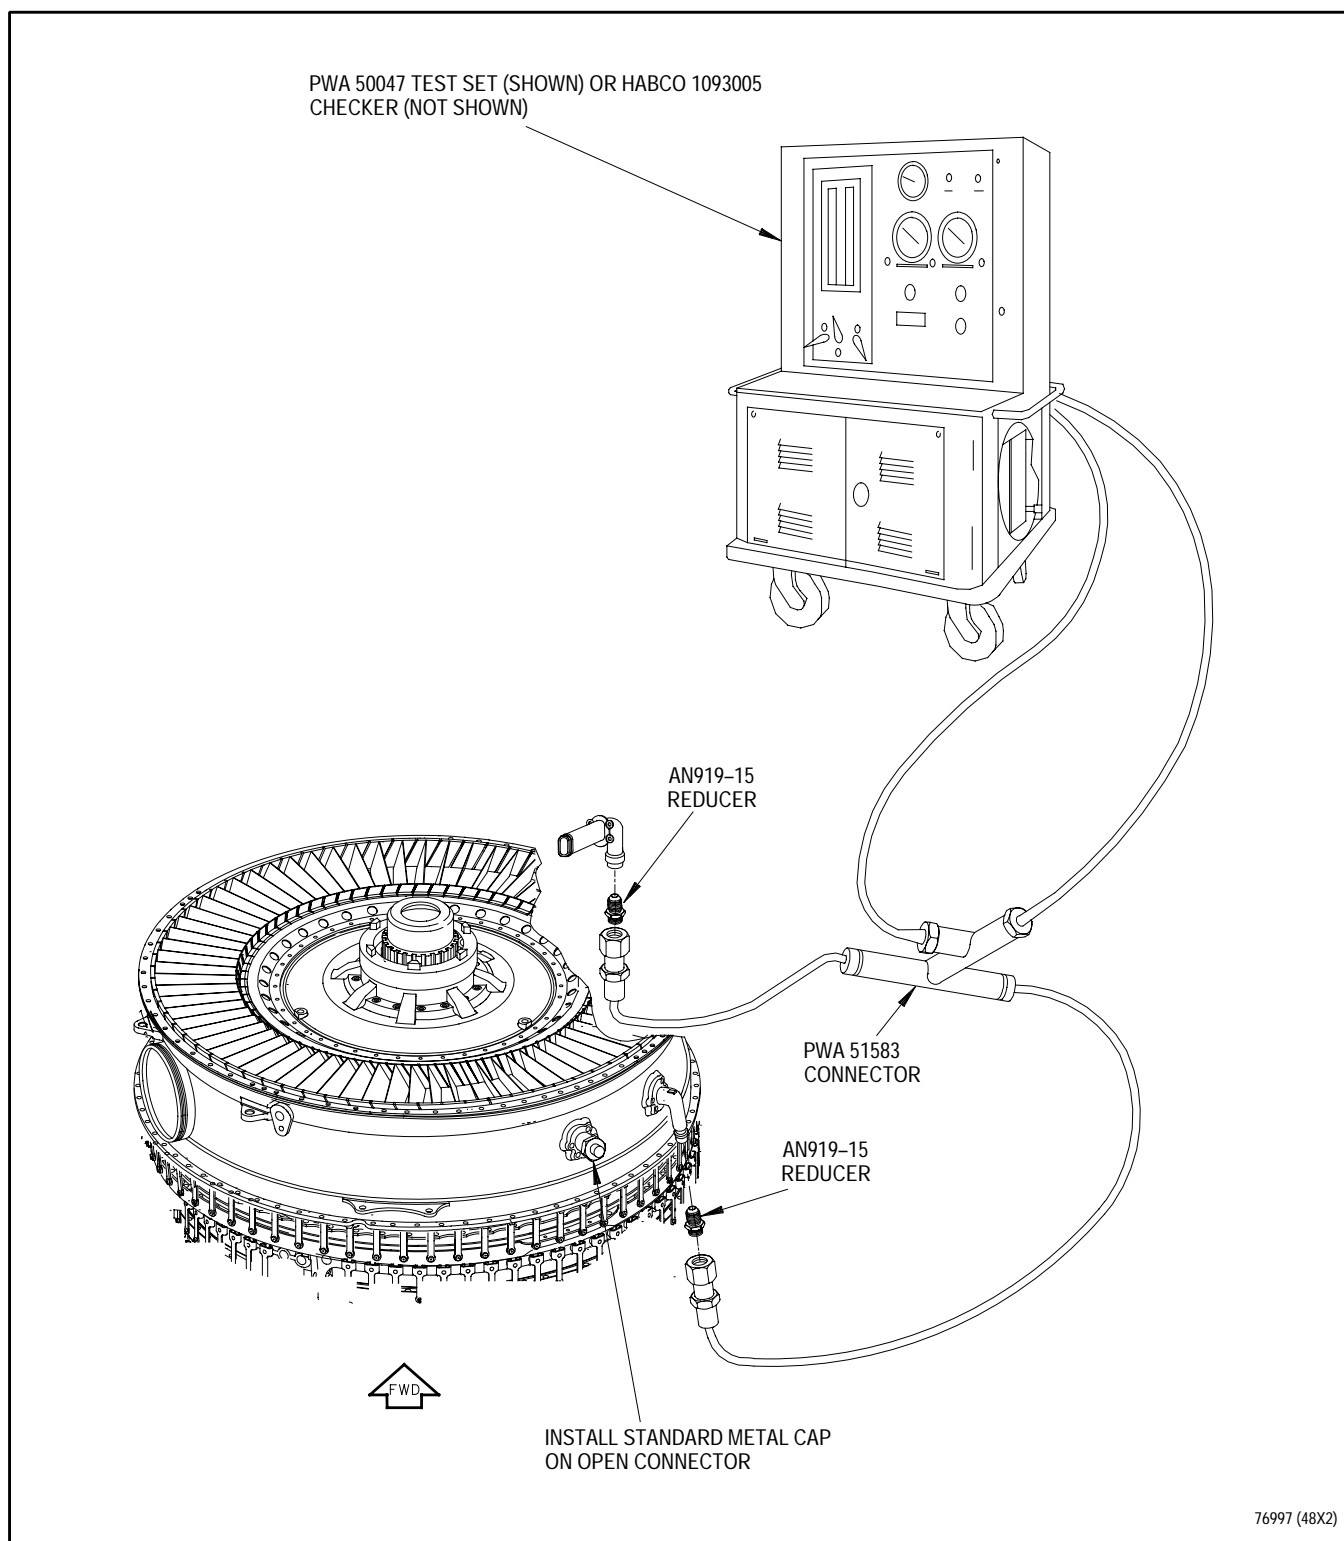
No. 2 and 3 Bearing Oil Nozzles - Air Flow Check Tool Installation
